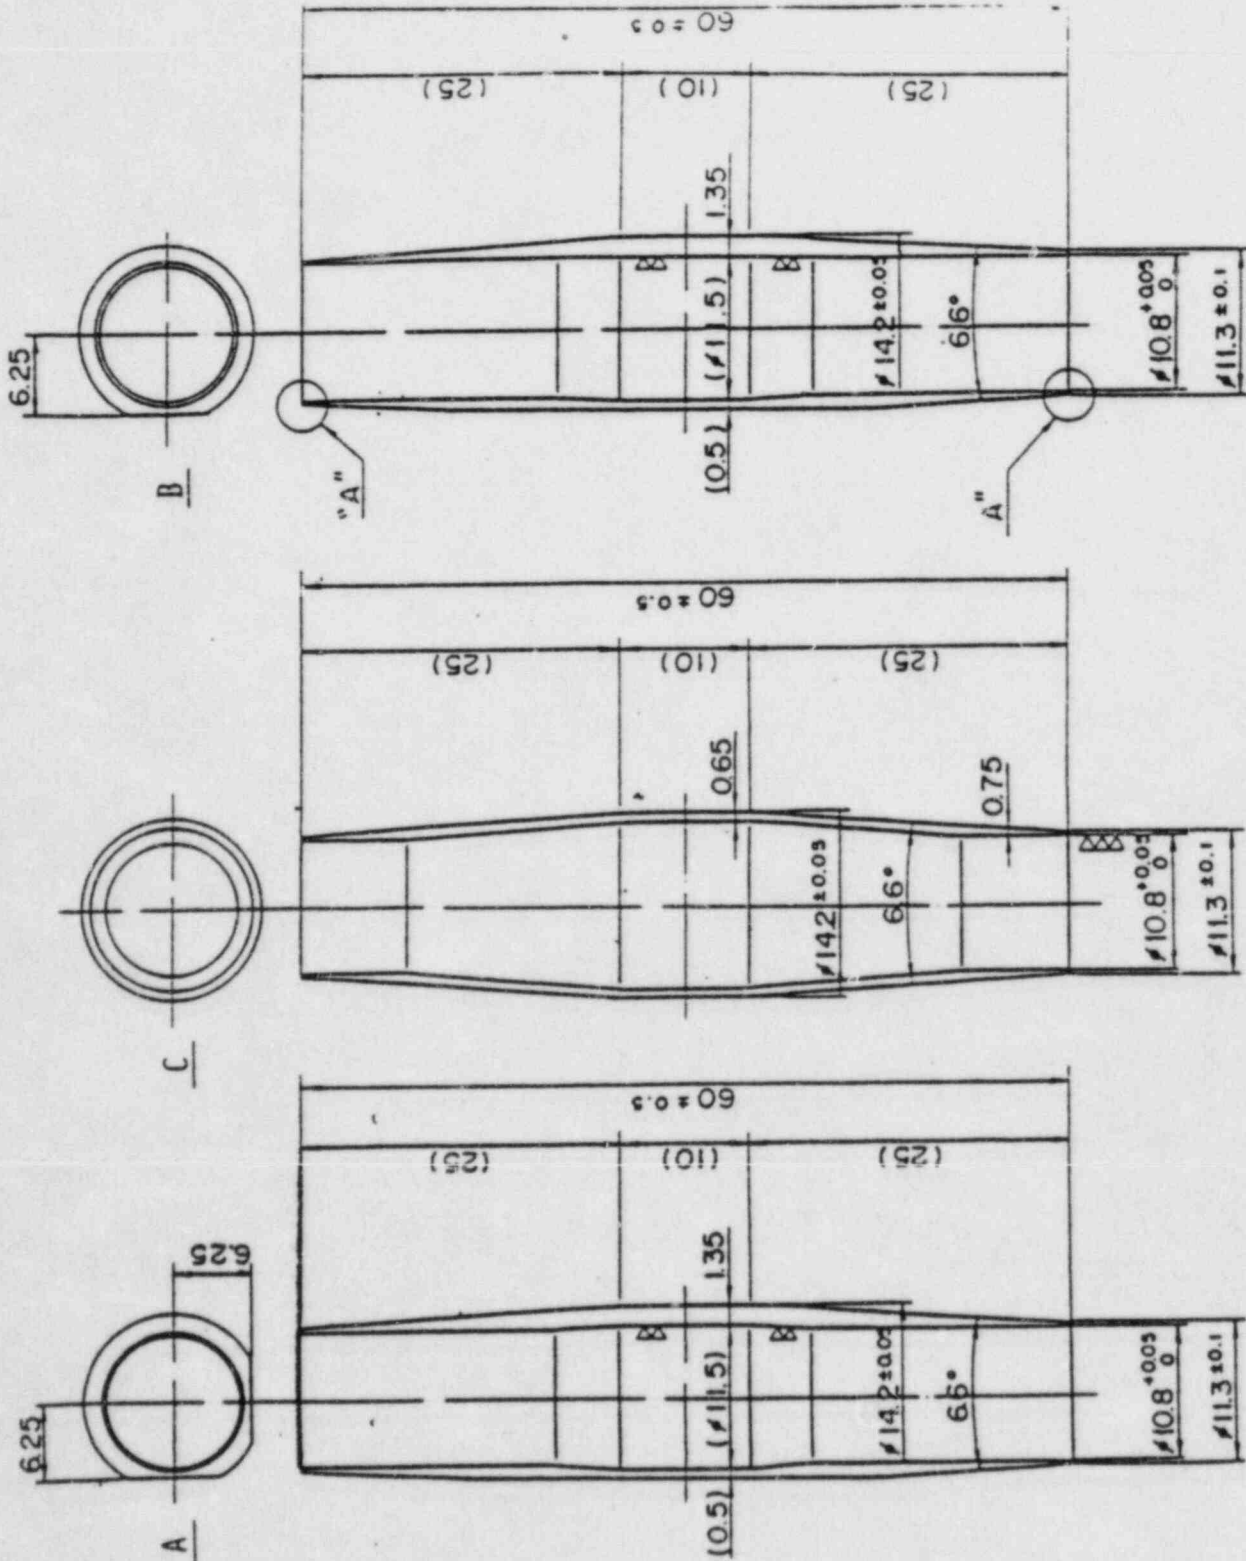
Configuration and Dimension of the Three Blockage Sleeves
